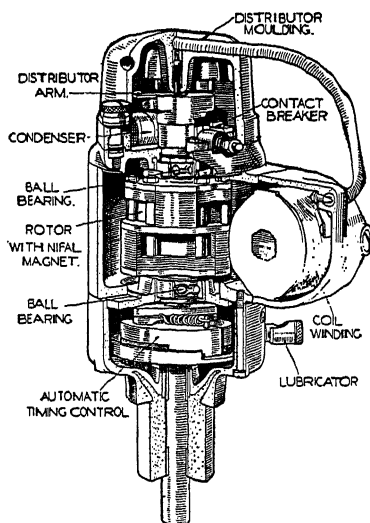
Automobile type of camshaft speed magneto. (Lucas).
